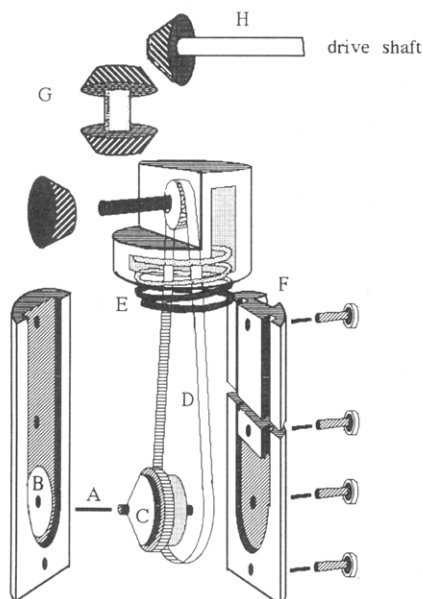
An exploded diagrammatic view of the rheometer illustrating the location of the cone (C) and the plate (B) in the insert. See the text for a detailed description of the components.
